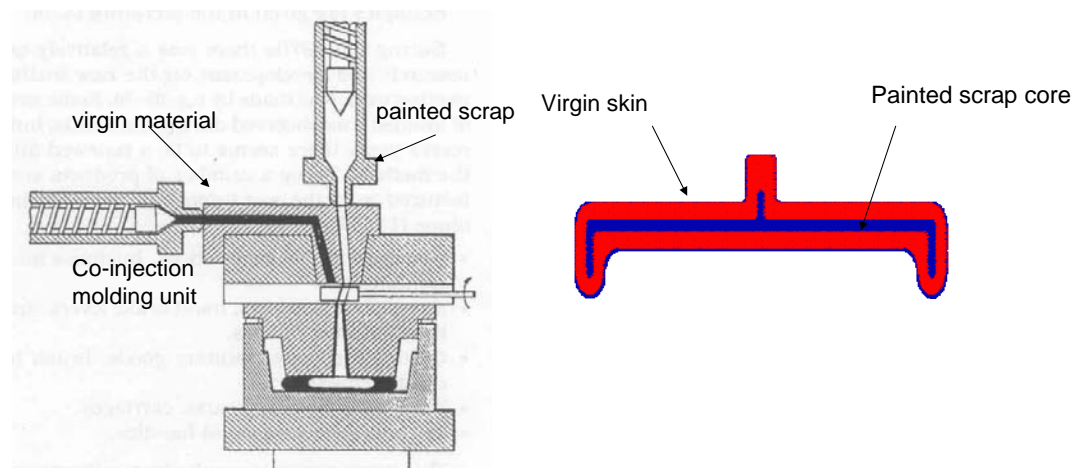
a) Sandwich molding machine with two injection units, one common nozzle, and a switching head [4]; b) Finished product cross-section.
